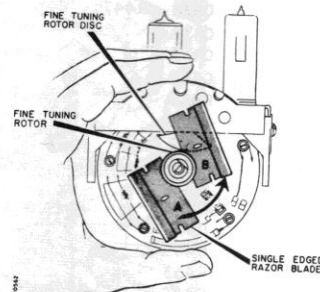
Front View of VHF Tuner Showing Method of Inserting Fine Tuning Disc and Fine Tuning Rotor.
